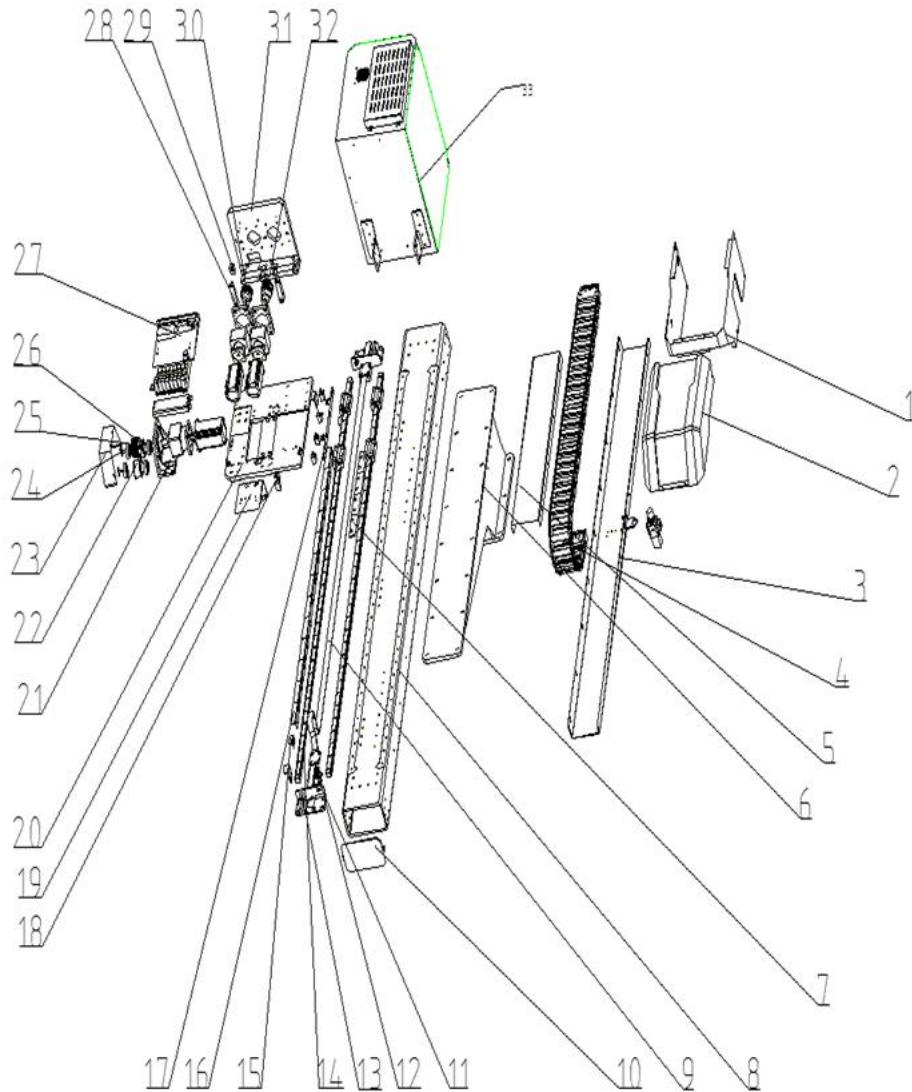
ST5 & ST5-T traverse unit exploded view
